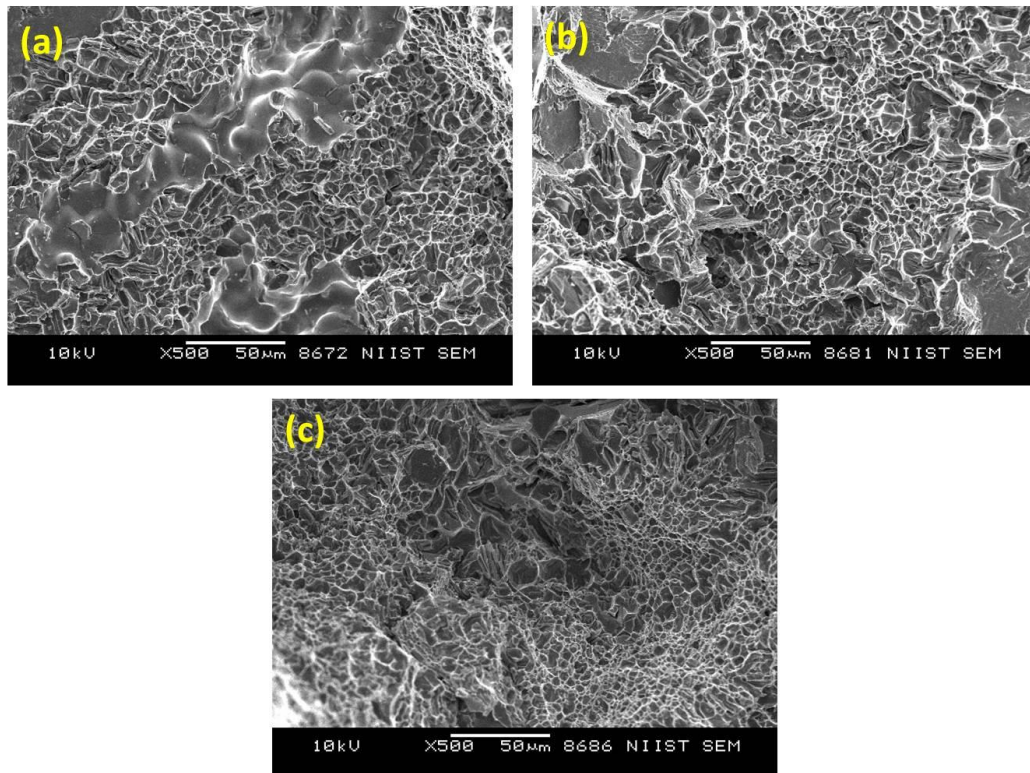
SEM analysis of fracture surface of A390-1.5 wt. % Mg (a) outer specimen (b) middle specimen and (c) inner specimen
